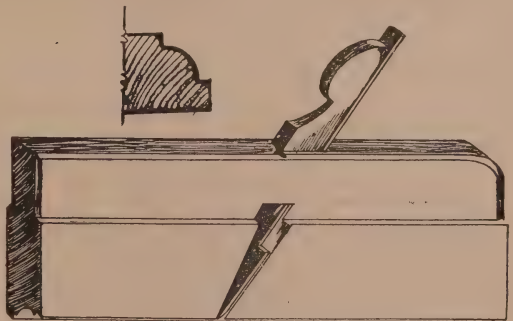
Ovolo Plane and Ovolo Moulding Cut by it
